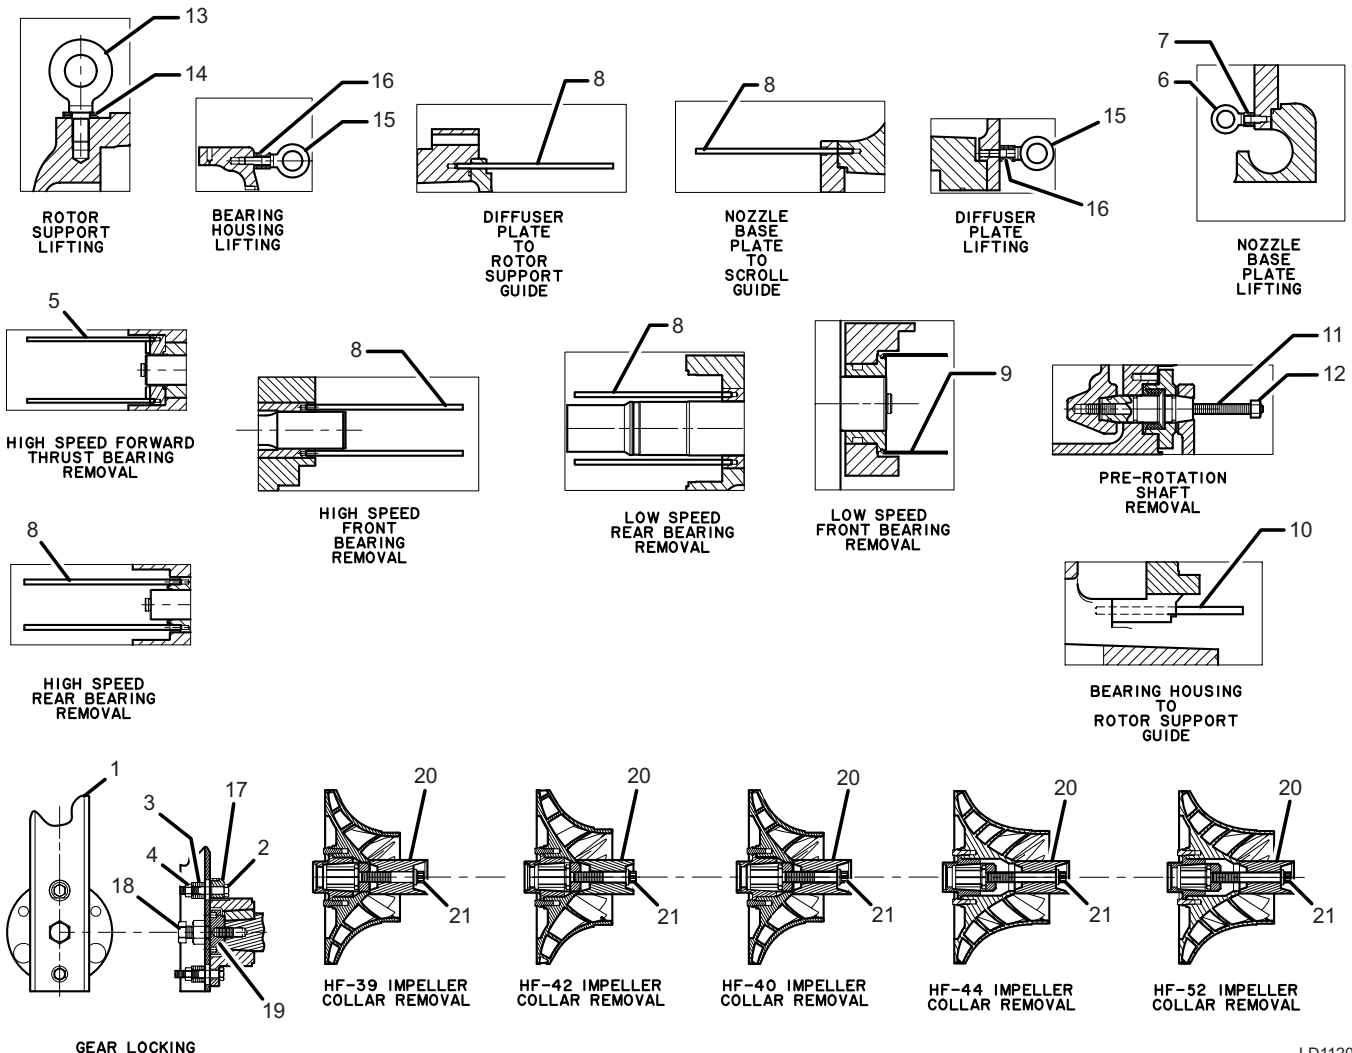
USE OF COMPRESSOR TOOLS (-39, -40, -42, -44, -52)
